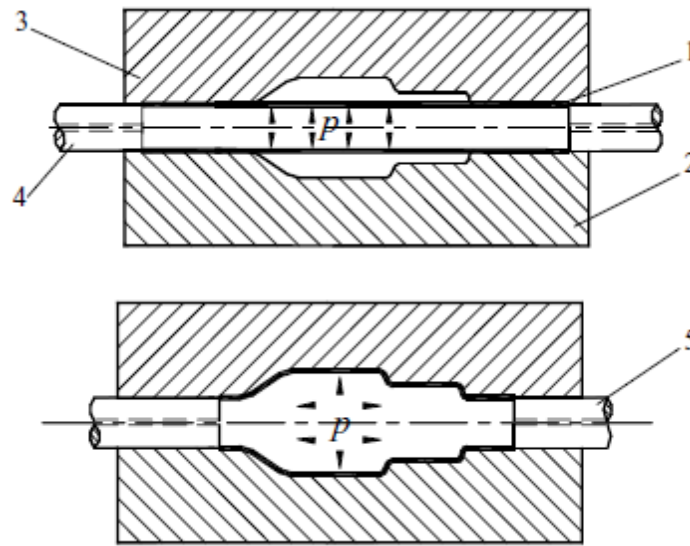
Tube hydro forming. 1 tube, 2 lower die, 3 upper die, 4 axial punch.[58]
